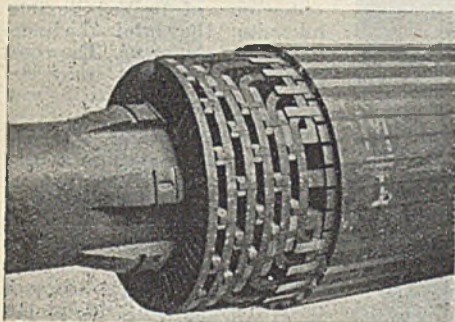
Rotor winding for 36 300 kVA, 11 000 V, 3 000 r.p.m. turbo-alternator (General Electric Co., Ltd.)
